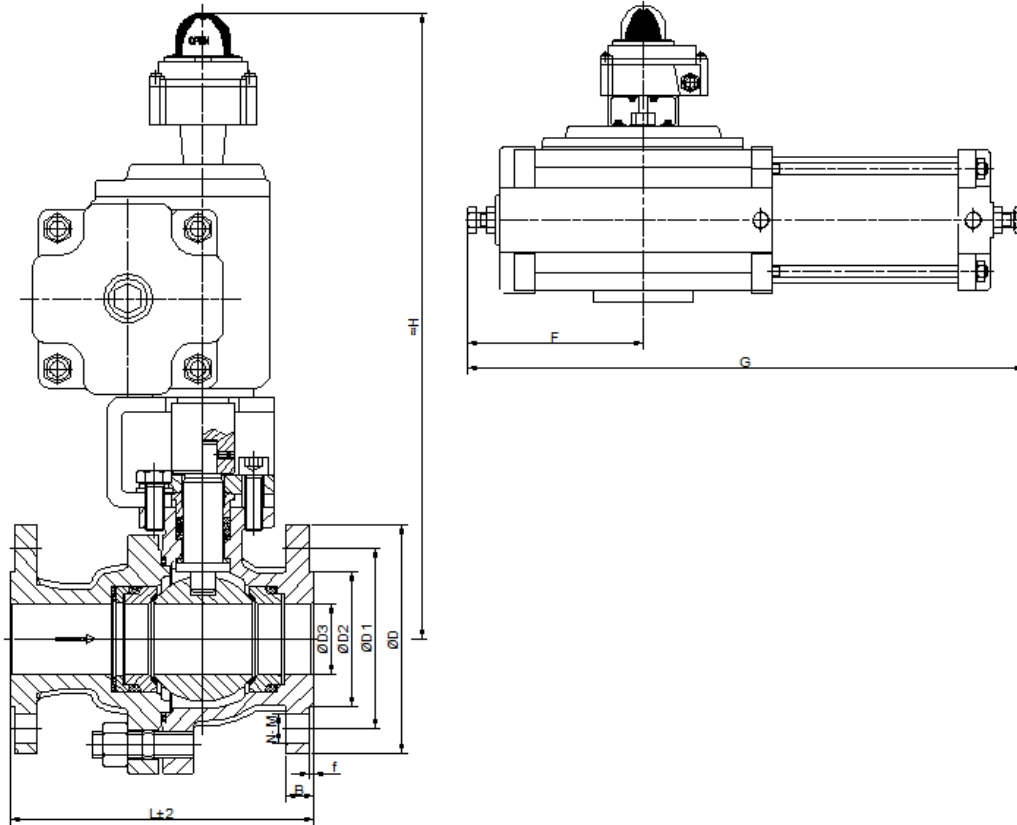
Dimensions of Linor floating ball valve with high temperature seat single-acting, PN16, flanged, sizes DN125-150
